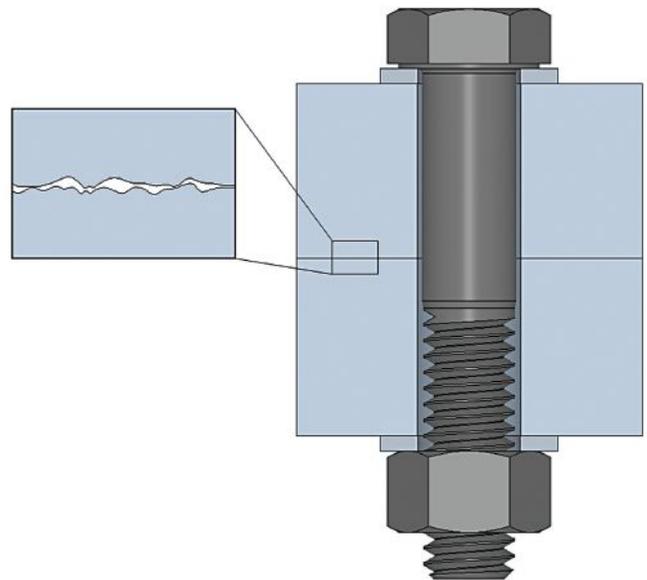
A bolted joint showing asperities on the surfaces of the joint plates (image courtesy of Matrix Engineering Consultants).
